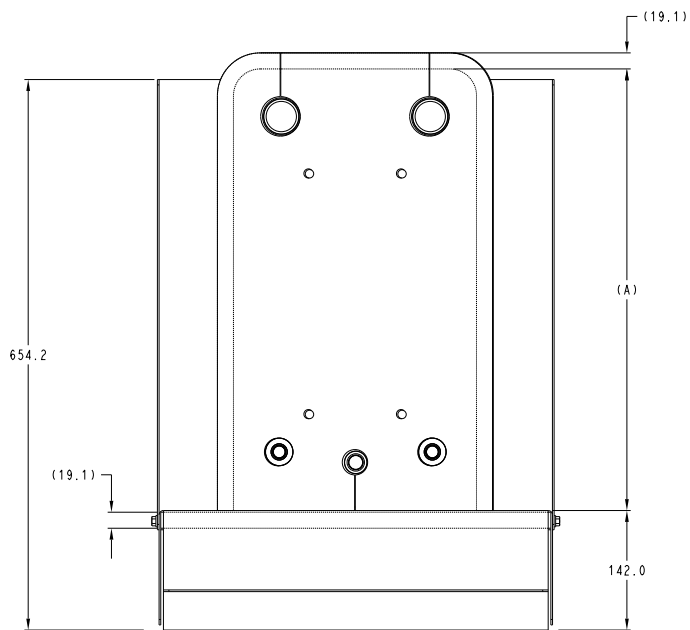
Evaporator Dimensions — 30RC035-060 Units
